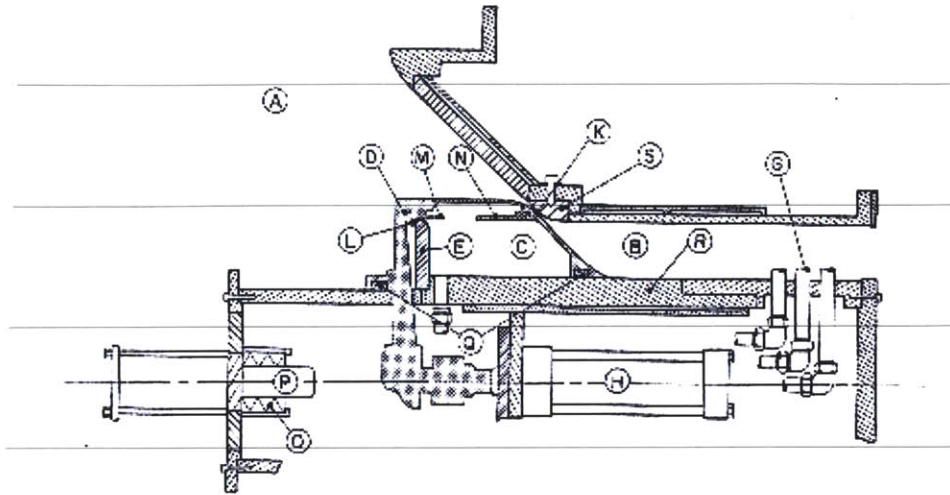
Schematic drawing of the Fast-Acting Valve [9]
